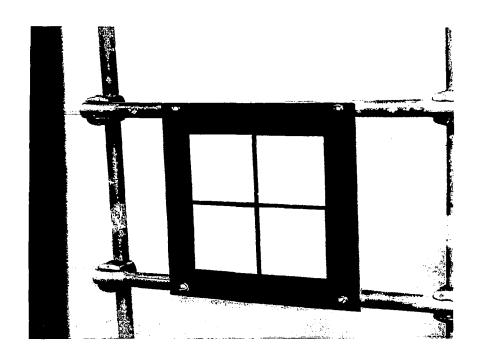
Plasma spray fixture holding four 2 x 2 in. test coupons.
